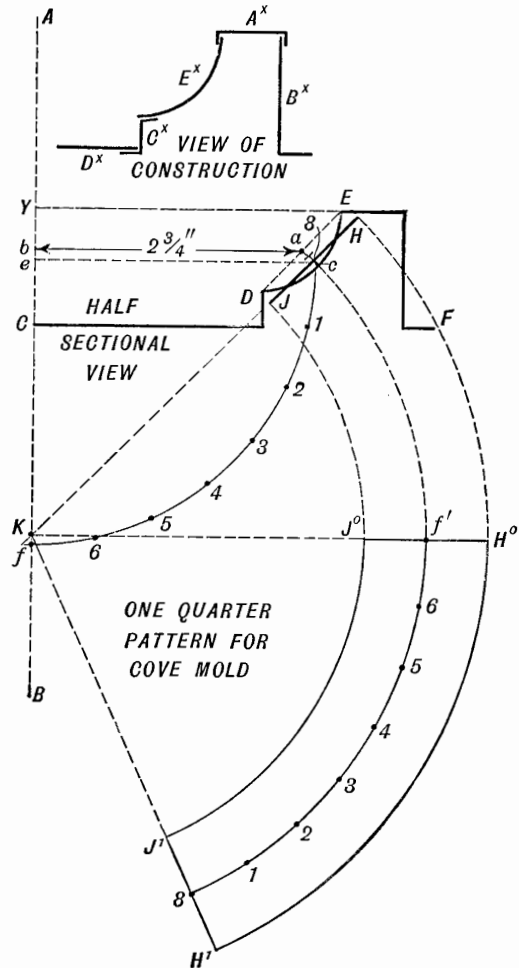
Pattern for Cove Mold in a Circular Panel
